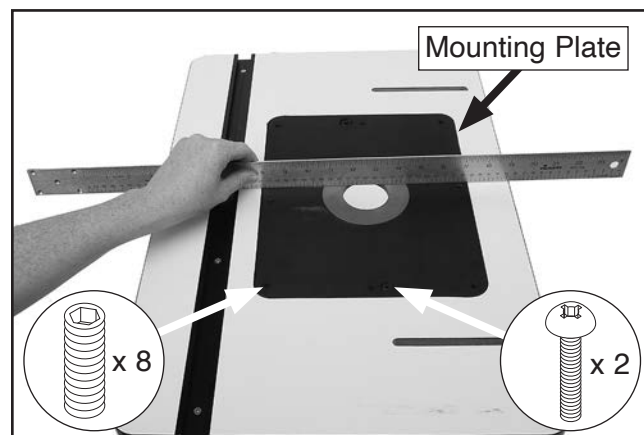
Example of using a straightedge to align mounting plate with table surface.
